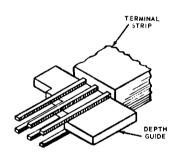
Method of Using Depth Guide for Soldered Connections on Terminal Strips
